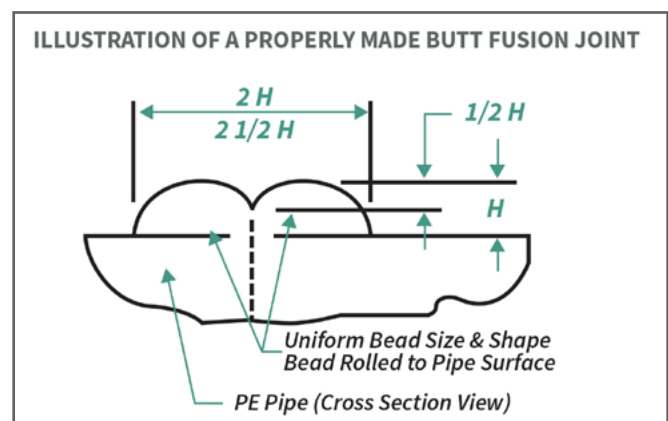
Ideal bead shape. (Source: Plastic Pipe Institute)
